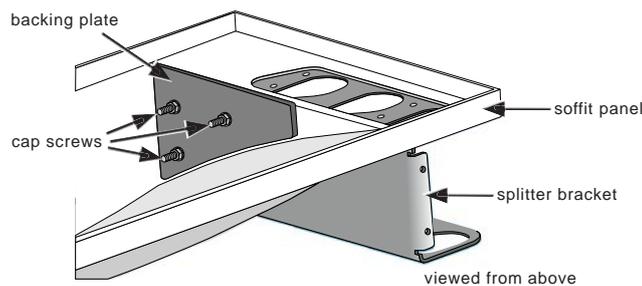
Fitting of Bracket and Backing Plate to Soffit Panel
